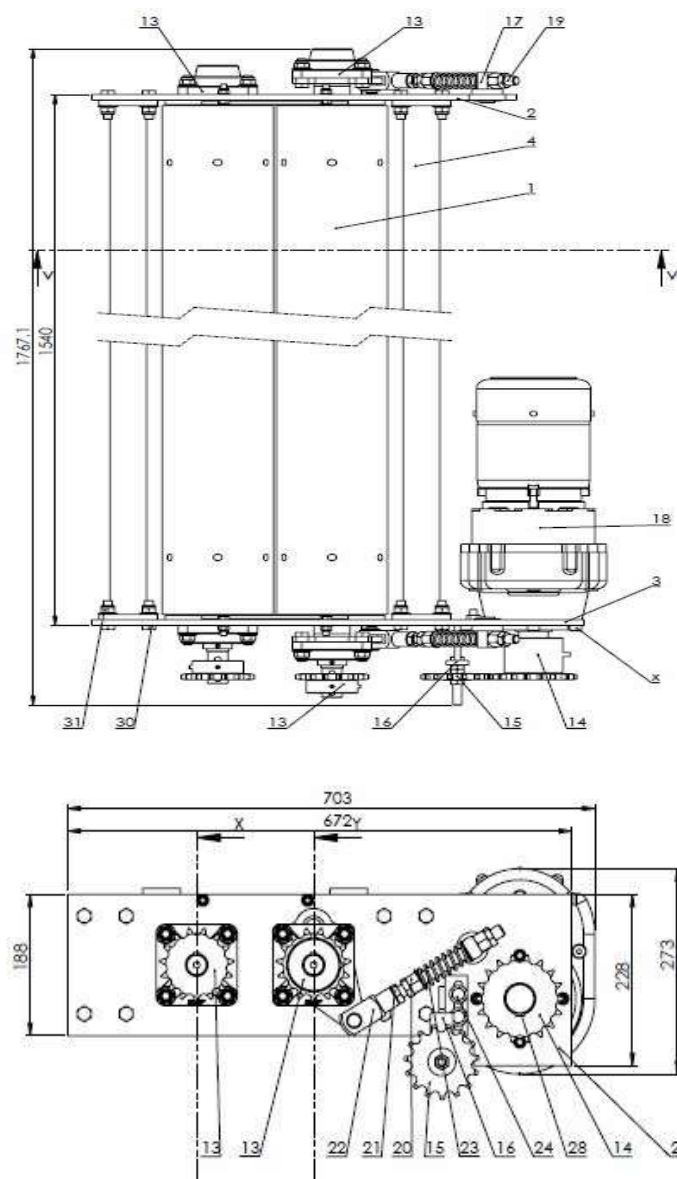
Drawing of the receiving module assembly with the adjustable gap and flexible pushing of the intake cylinders, [5]
